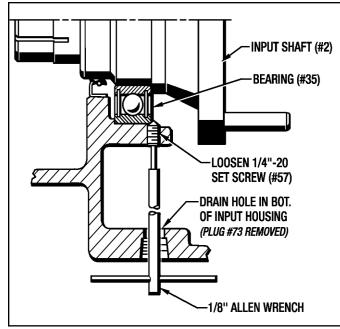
Loosening Bearing Retainer Set Screw (#57)
